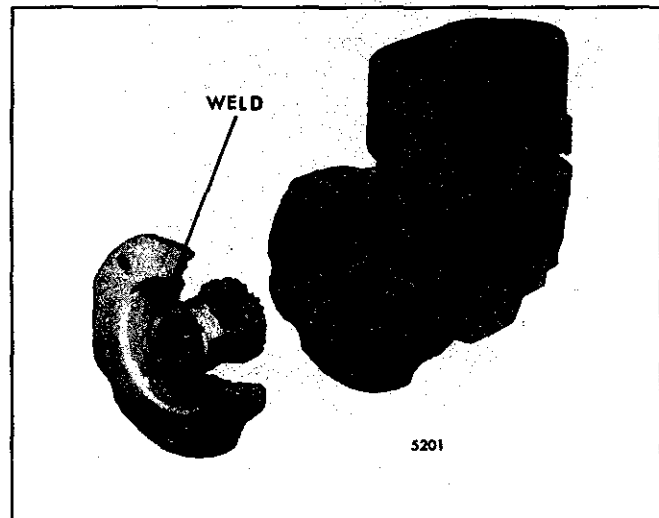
Fixture for Holding Drive While Installing or Removing Slotted Nut
